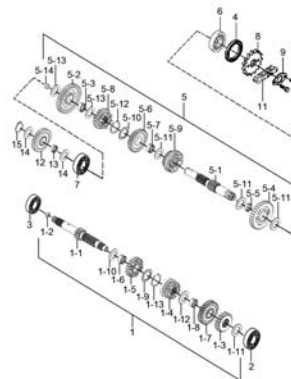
GEAR SHIFTING (P12-S160-0003)
